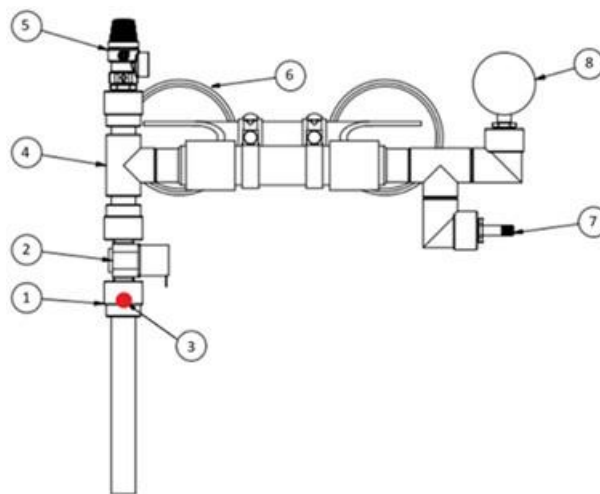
Depiction of the Brake-Marker: 1) barrel, 2) solenoid valve, 3) paintball, 4) pressure accumulator, 5) safety valve, 6) vacuum mounting bracket, 7) pressure gauge charging valve, and 8) pressure gauge
